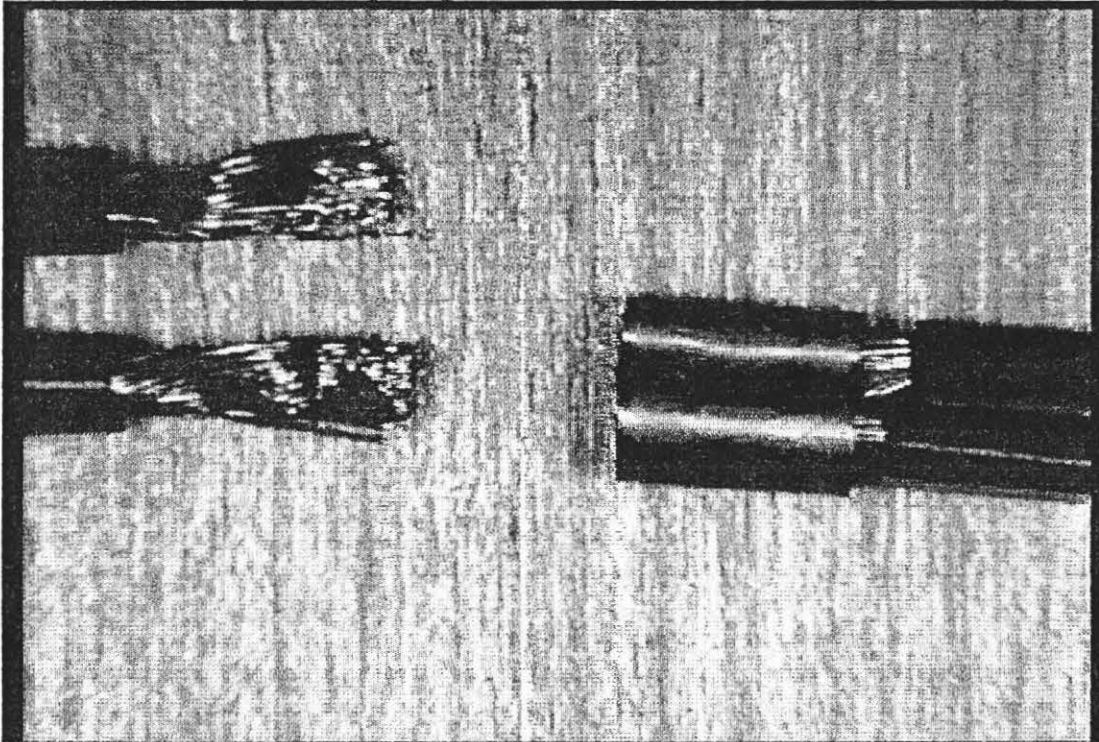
, Failure of the copper wire strands of a crimped connection, by fracture of strands away from the crimped joint
